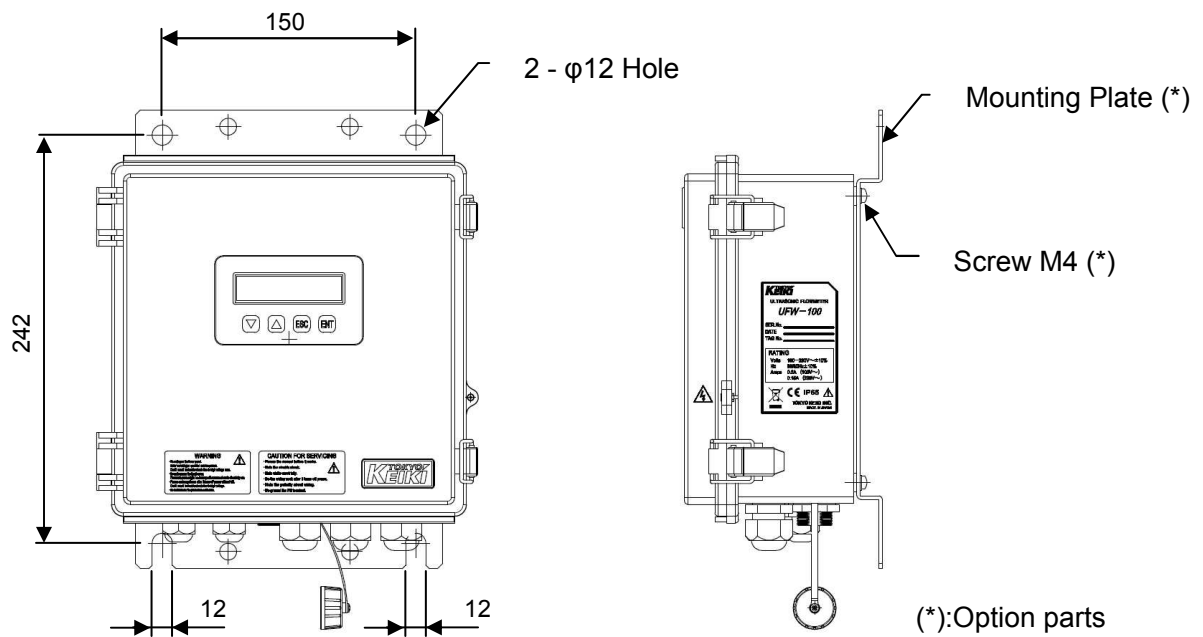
Wall mounting (by mounting plate, Option parts)
